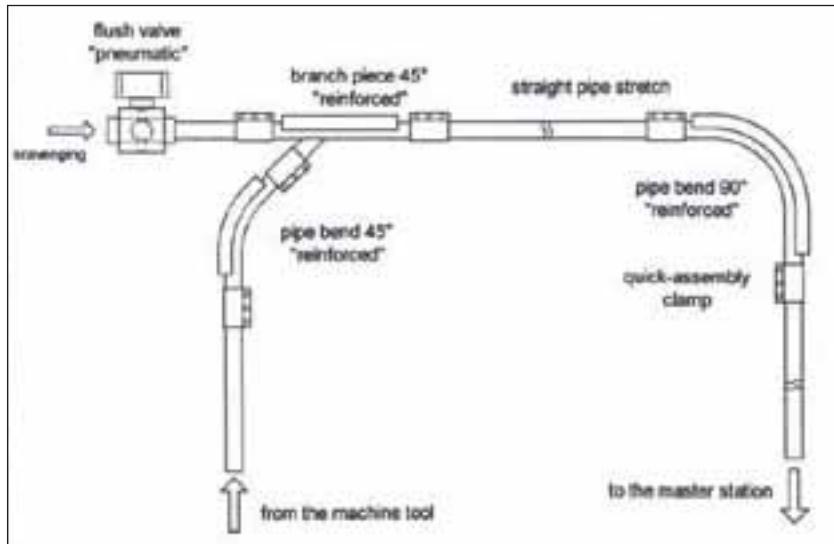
Schematic drawing showing suitable pipe work design with reinforced bends and branch piece.
